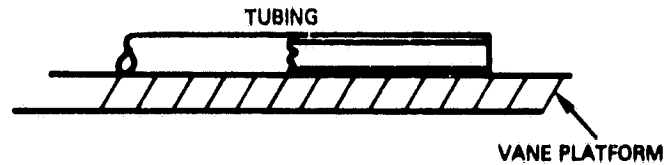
Typical Pressure Sensor Installation. The tube has a 0.813 mm (0.032 inch) outer diameter, and a 0.508 mm (0.020 inch) inner diameter.
